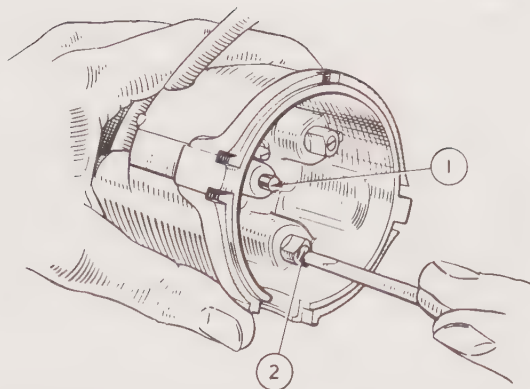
6 Method of attaching or releasing high-tension cables from distributor cap.
